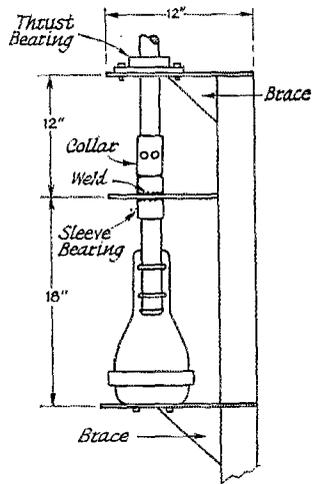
Sketch showing plates for mounting shaft bearings and the rotator at the top of the 4-inch column. The plates are made of $\frac{3}{16}$ -inch steel. Top and bottom plates have triangular braces of the same material. The sleeve bearing is welded in a clearance hole in the center plate.
